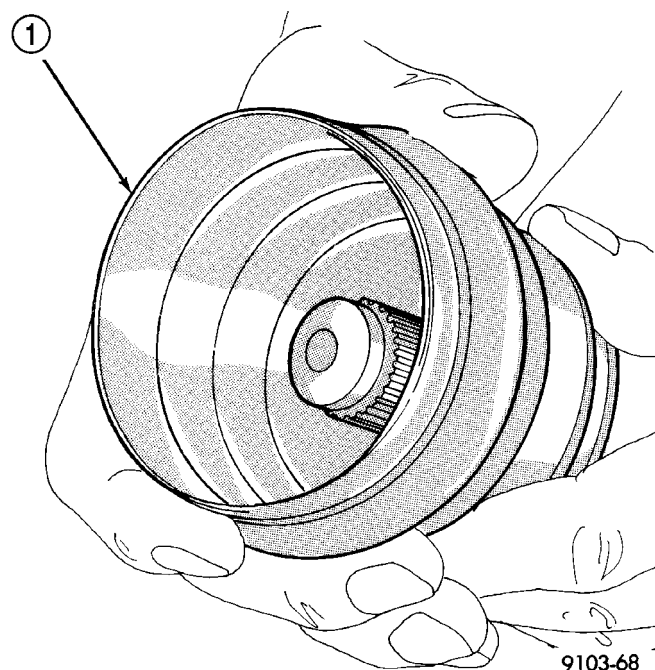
Install CV Boot Onto Interconnecting Shaft
